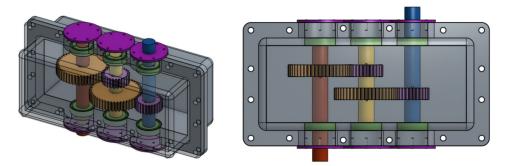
Experiment 2 Gearbox Assembly for Design Review
